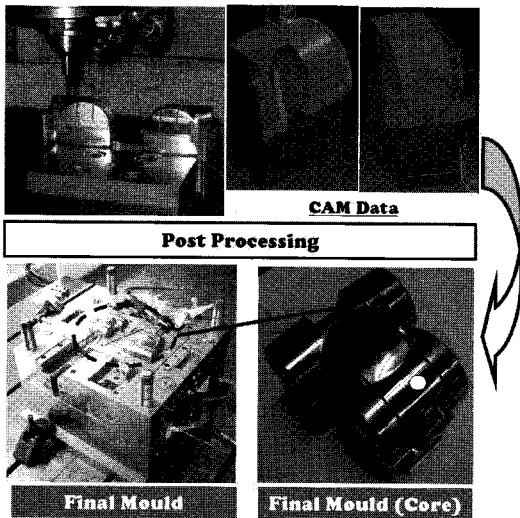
(b) Post-processing of 1st step mould and a finally manufactured mould
